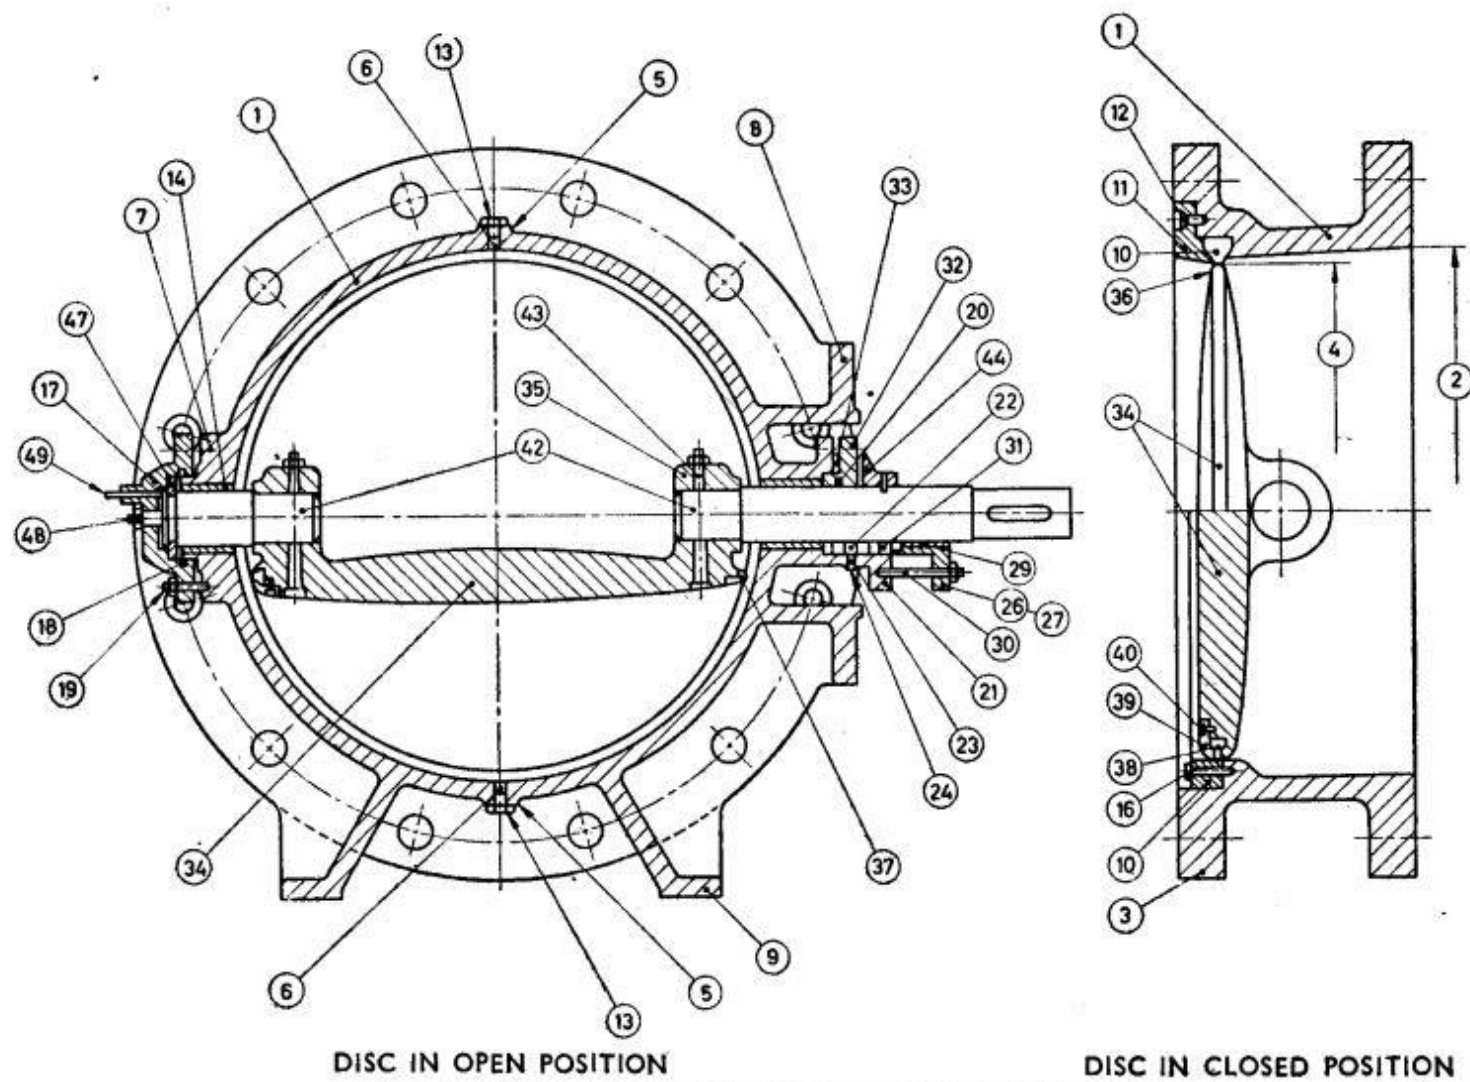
TYPICAL FLANGED TYPE BUTTERFLY VALVE
